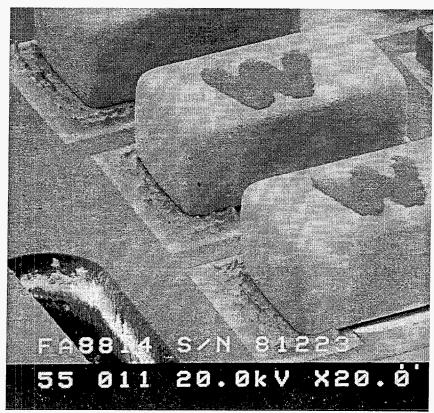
20X SEM view of silver\epoxy, passive component and die attach.
